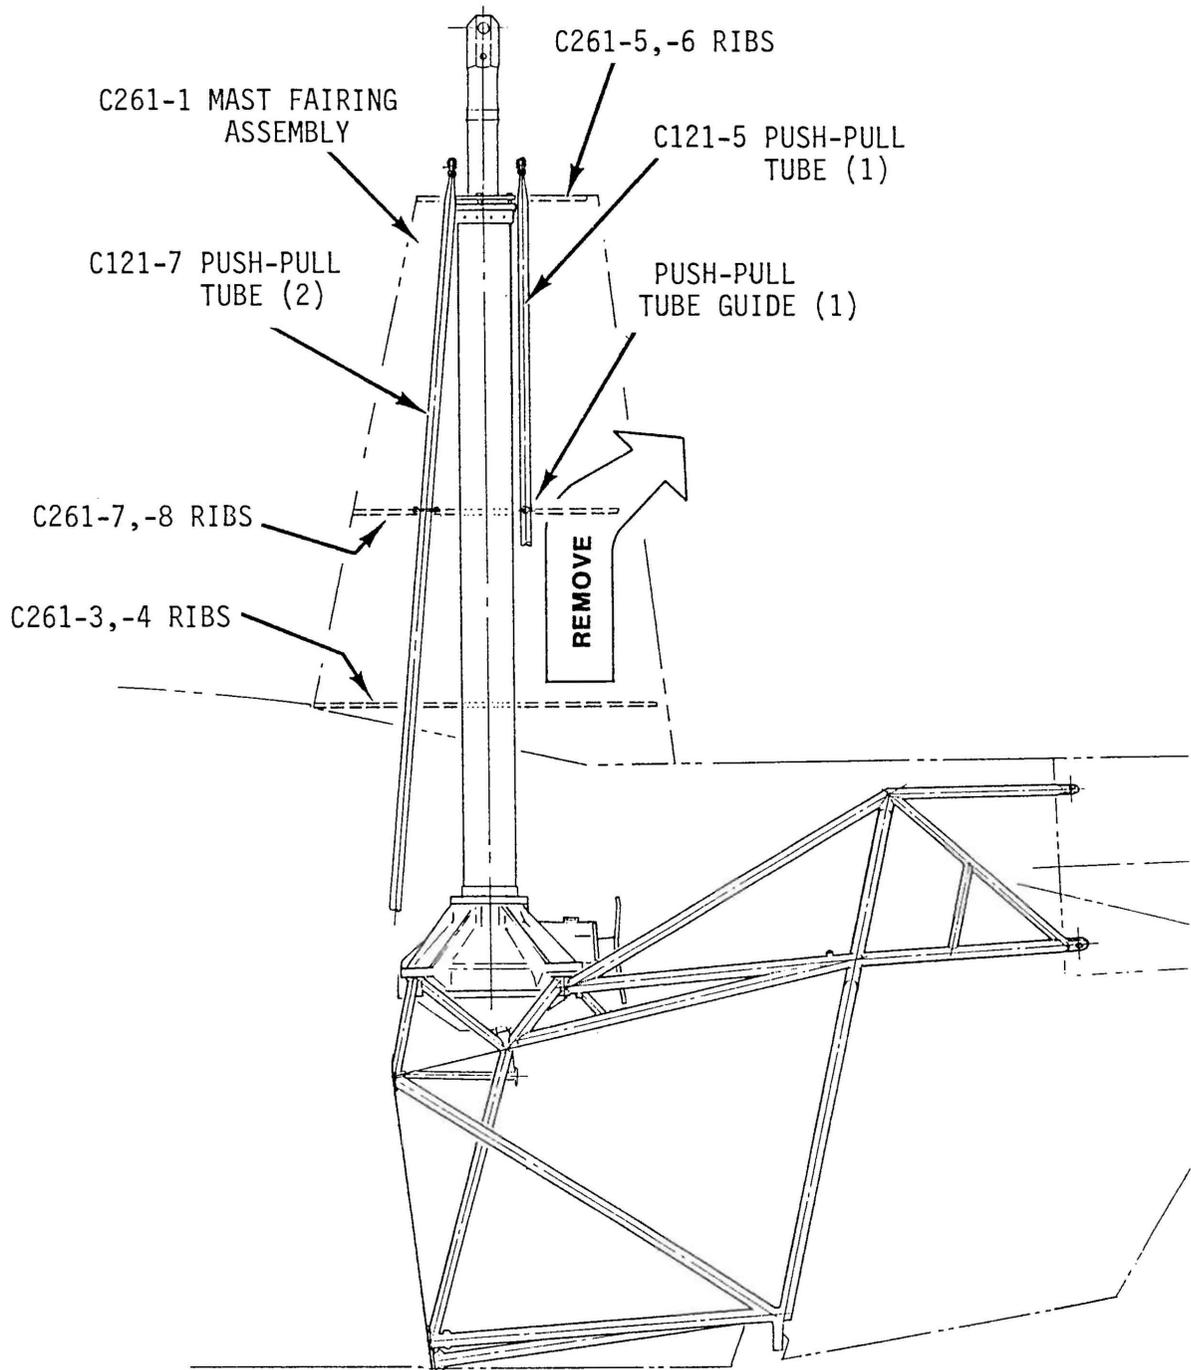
MAIN ROTOR GEARBOX REMOVAL
